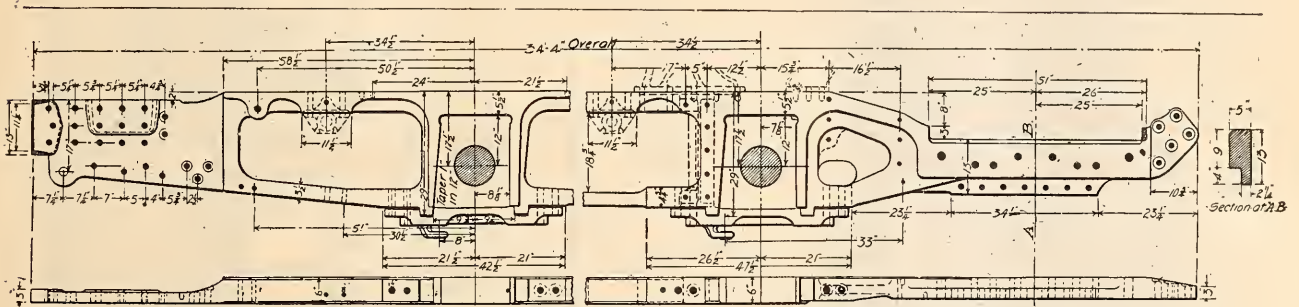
HEAVY FREIGHT LOCOMOTIVE—L. S. & M. S. RY.—FRAME.
